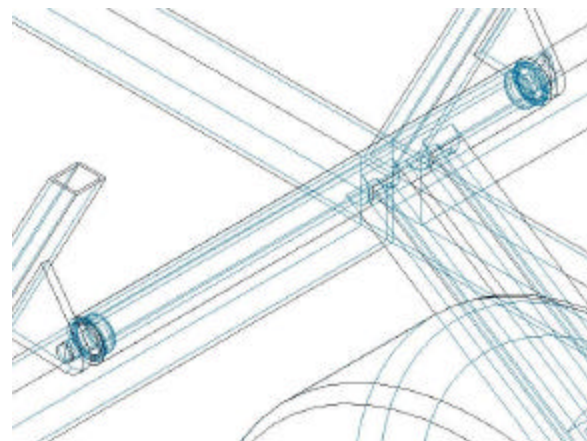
, right: Supported by the two end brackets, the swing arm rotates around bearings fixed into the ends of the swing arm support tube.
